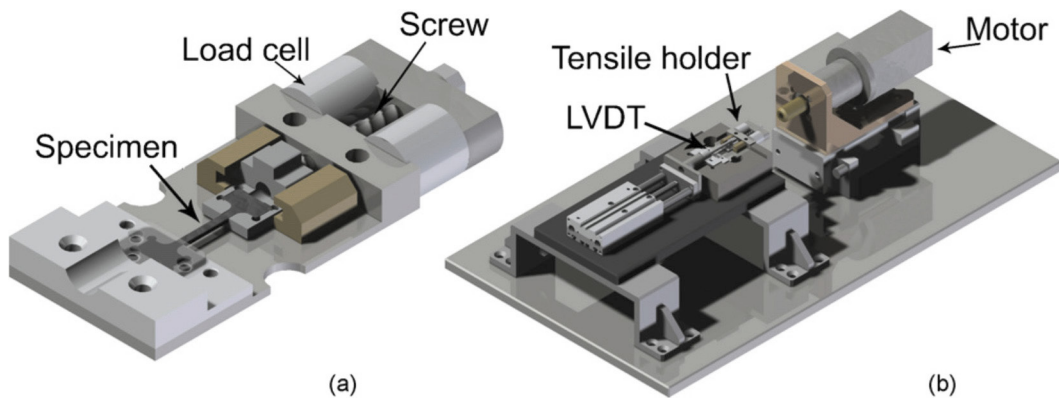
Tensile holder with microtensile specimen (a); fatigue testing machine (b) (Di Cocco et al. 2011).
